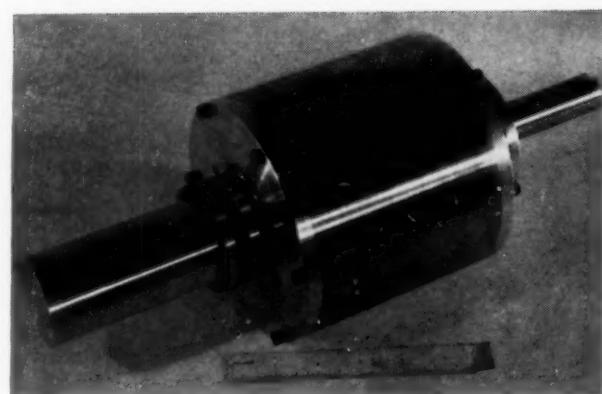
LARGE ELECTROMAGNETIC FLUID CLUTCH OF THE TYPE SUITABLE FOR USE IN AUTOMOBILES AND MACHINERY
